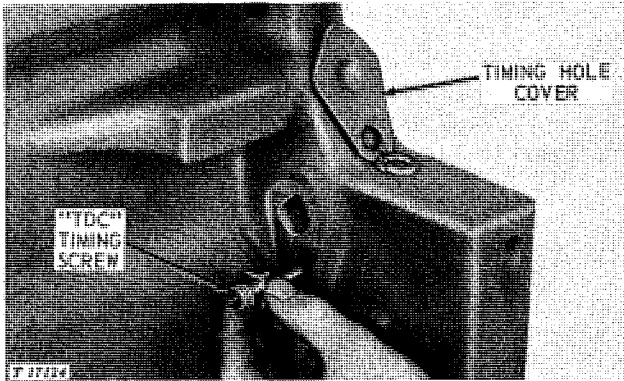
Using Timing Screw to Set Engine at "Top Dead Center"
